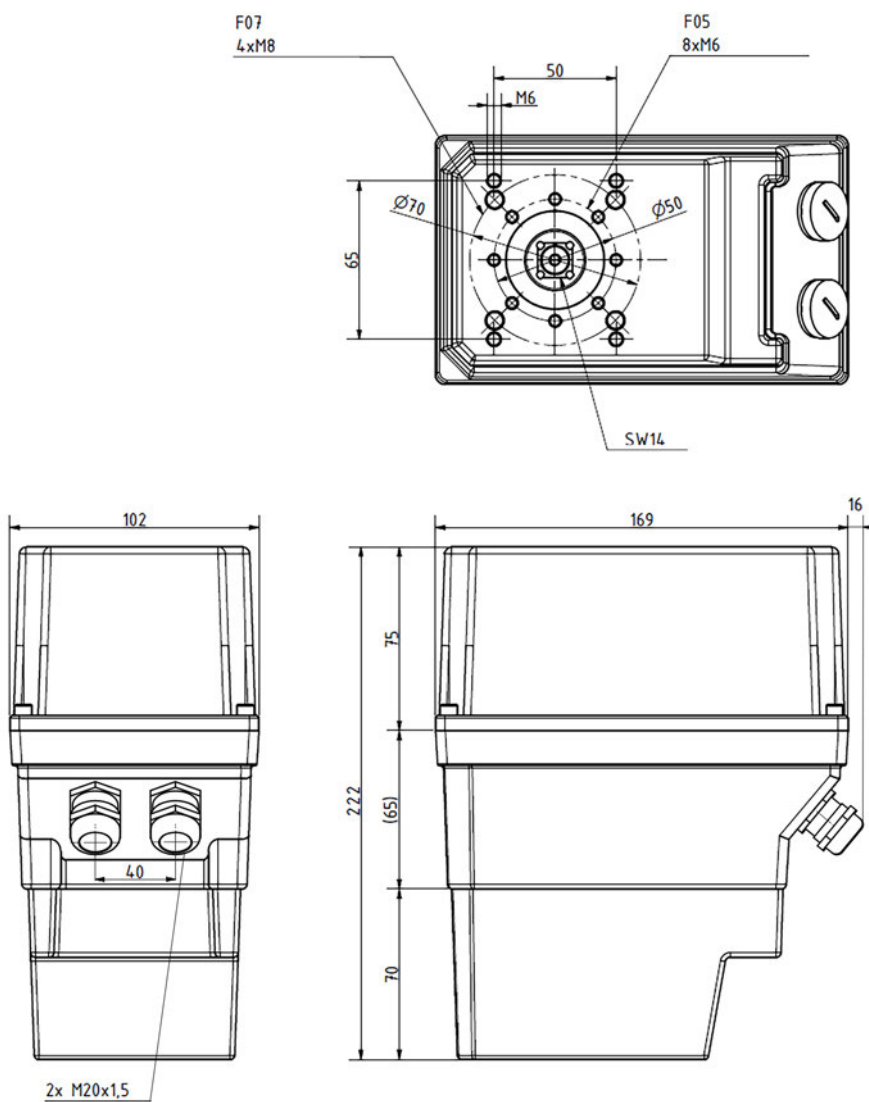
Dimensional drawing 60 Nm actuator with cable entry point and screwed cable gland (dimensions in mm)
